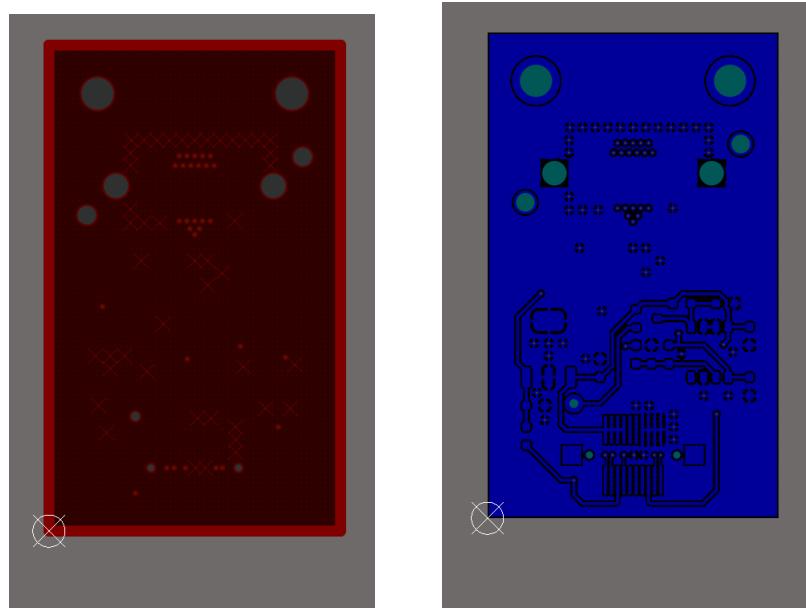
Pulser Board Inner Bottom and Bottom Layer
